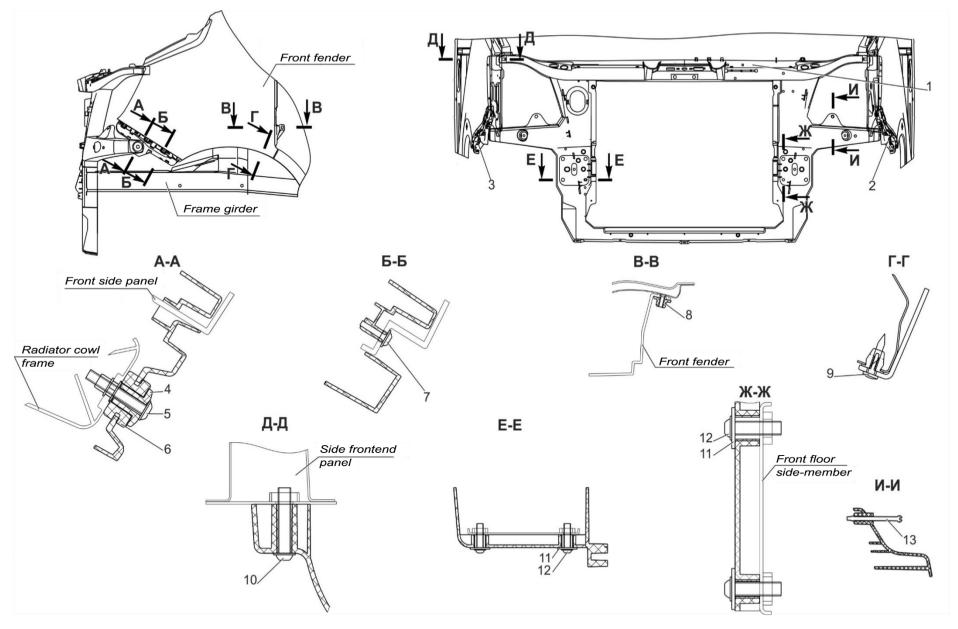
Radiator frame base (frontend) installation: 1 - radiator frame base; 2,3 - front fender holders; 4 - spacer bushing; 5,7,8,10,12 - screws; 6 - bushing; 9 - nut; 11 - washers; 13 - adjusting screw
